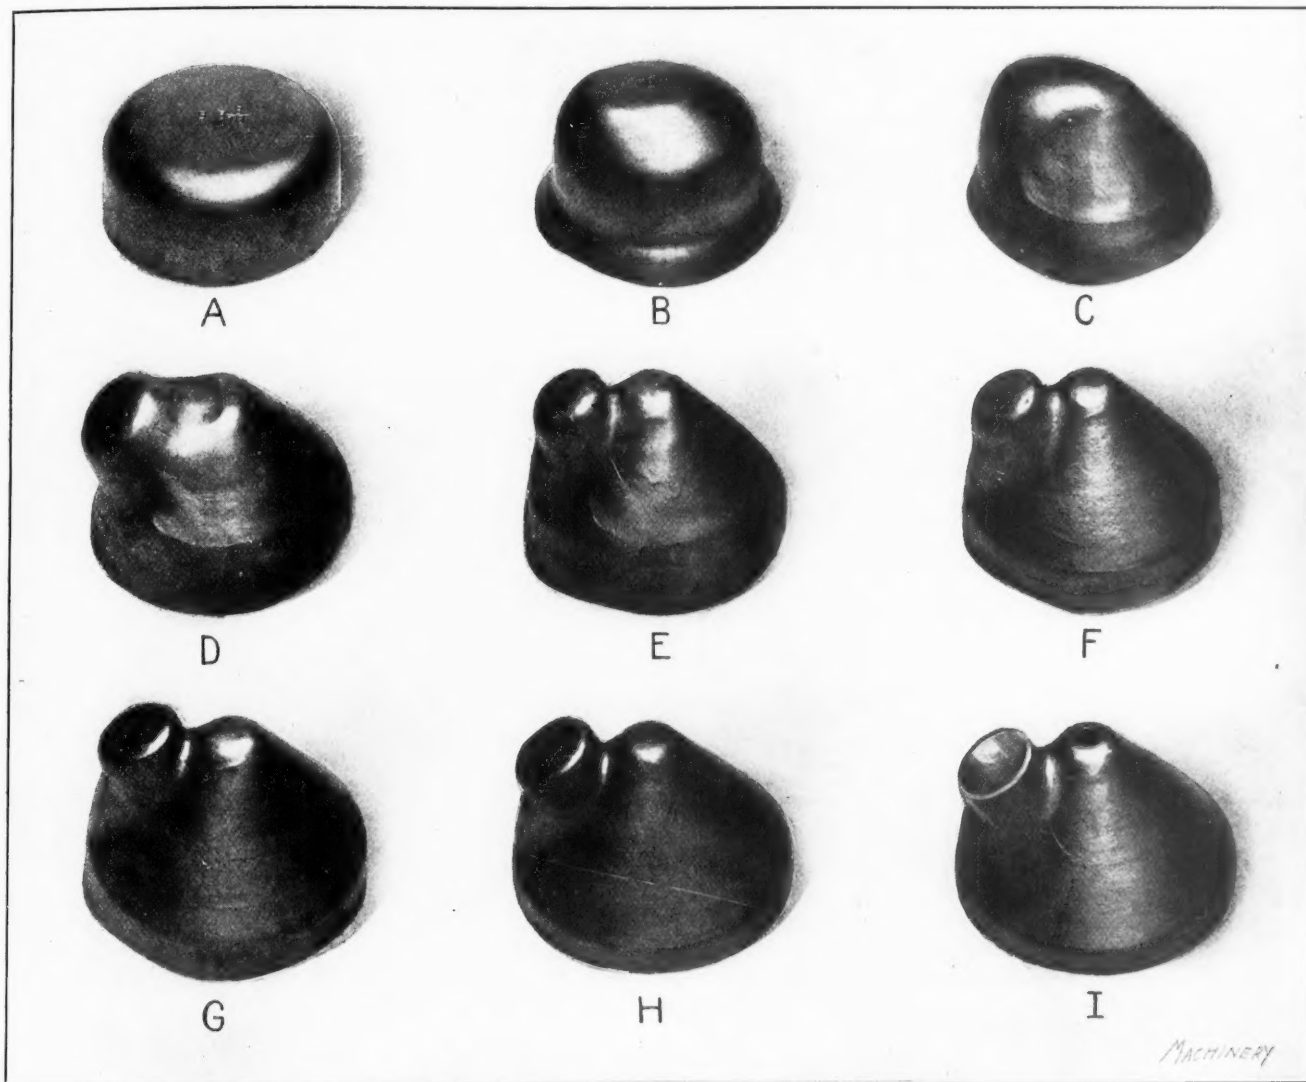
Successive Drawing Operations on a Motorcycle Muffler Base
